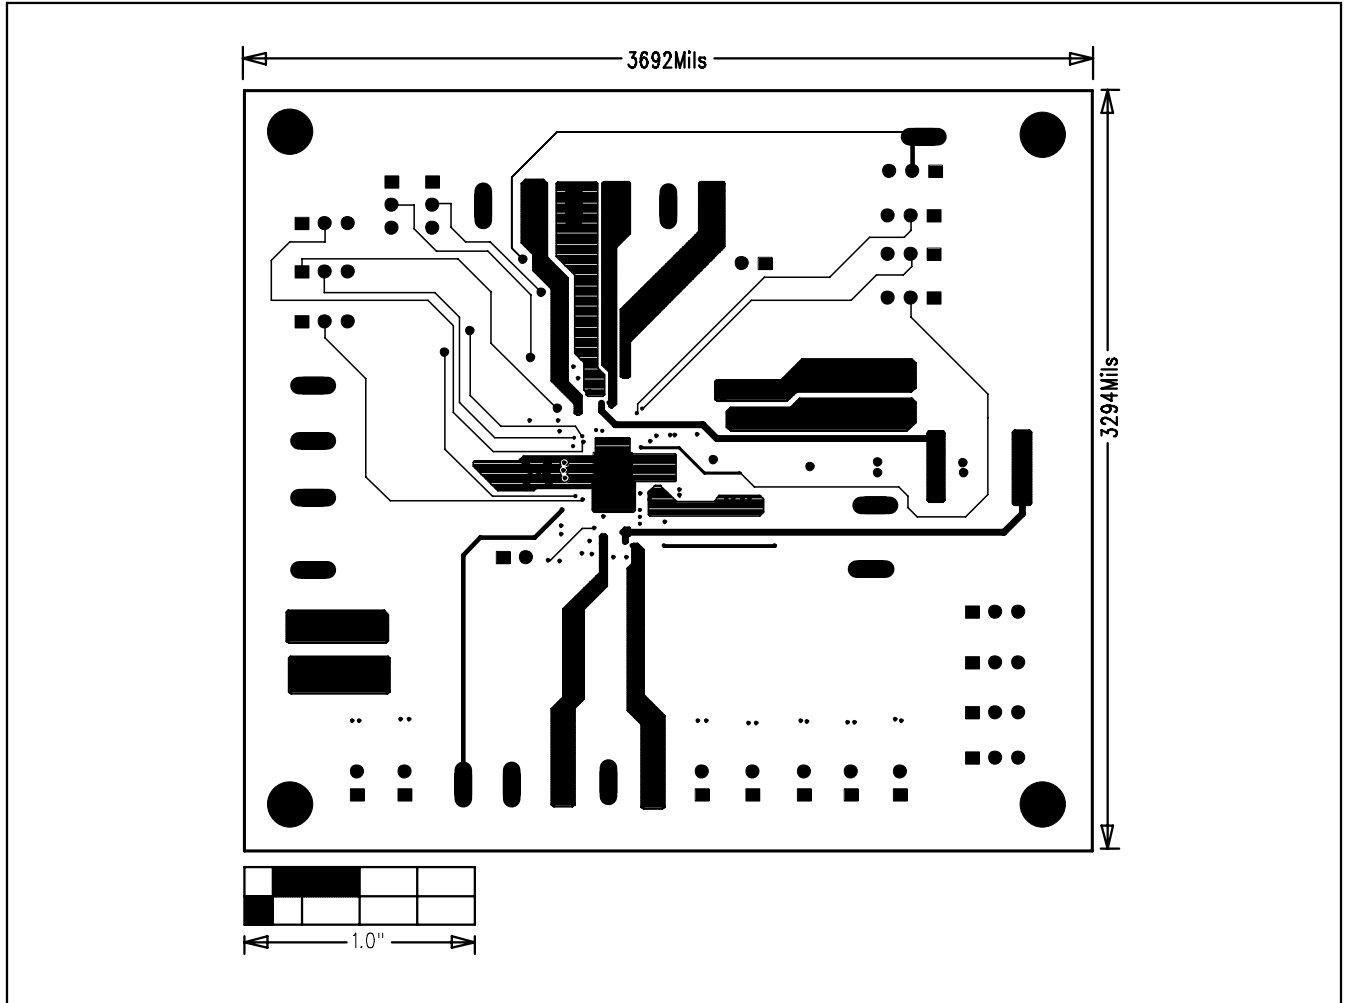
MAX8662 EV Kit PCB Layout—Bottom Layer 6
